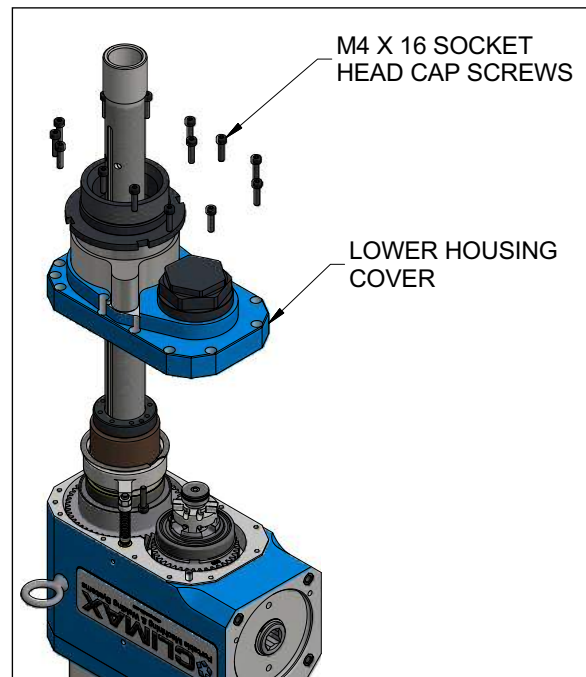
REMOVE THE LOWER HOUSING COVER
